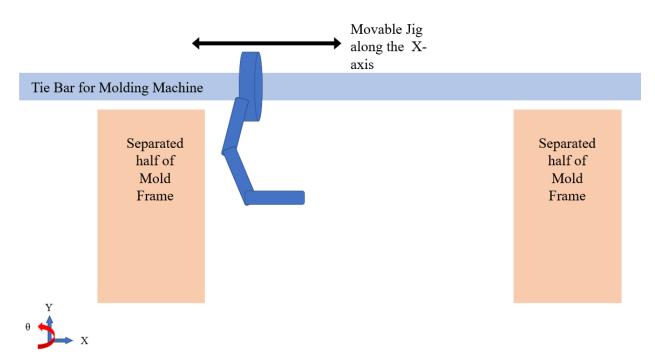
Design 3 features a single jig to install inserts of both mold halves.
